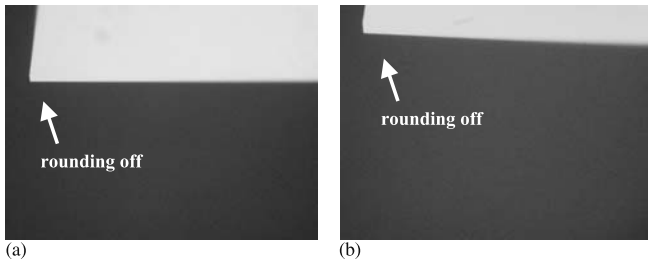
,b. Nomarski photographs of tool flank face after a 21.255 and b 50.145 km cutting distance (magnification: $\times 500$)
